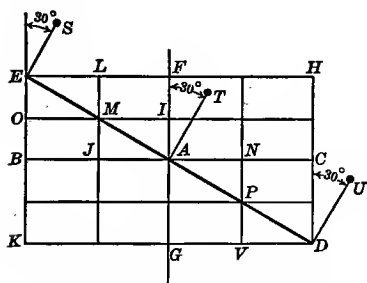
SECTION OF CAM CHART BEFORE BENDING
